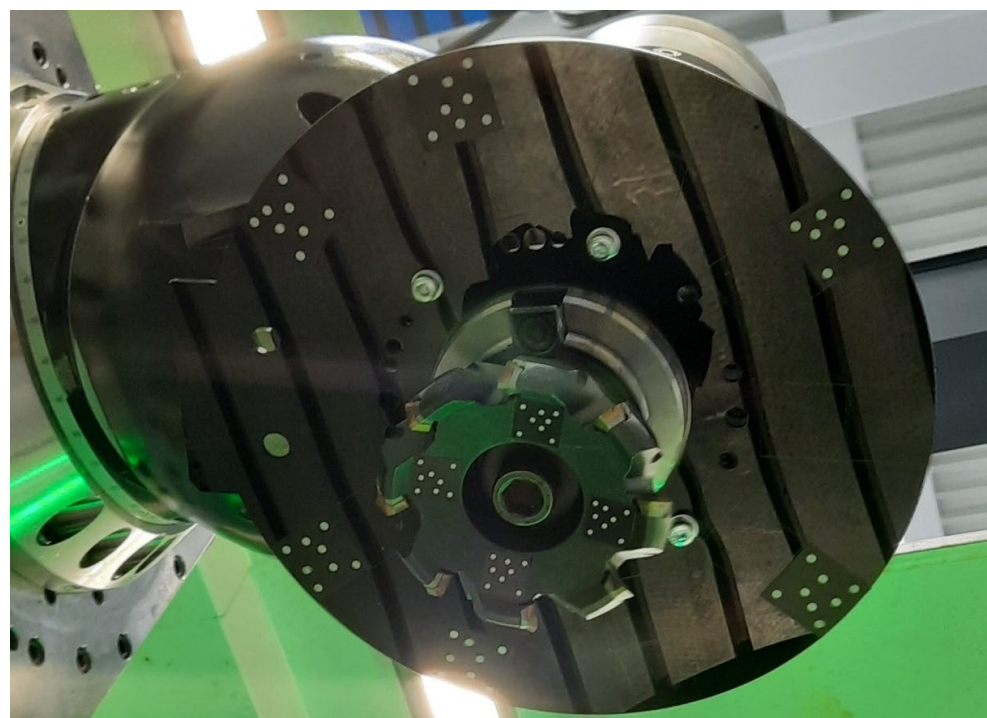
VMS 'Domino' markers on the Soralue machine head and machine tool.
